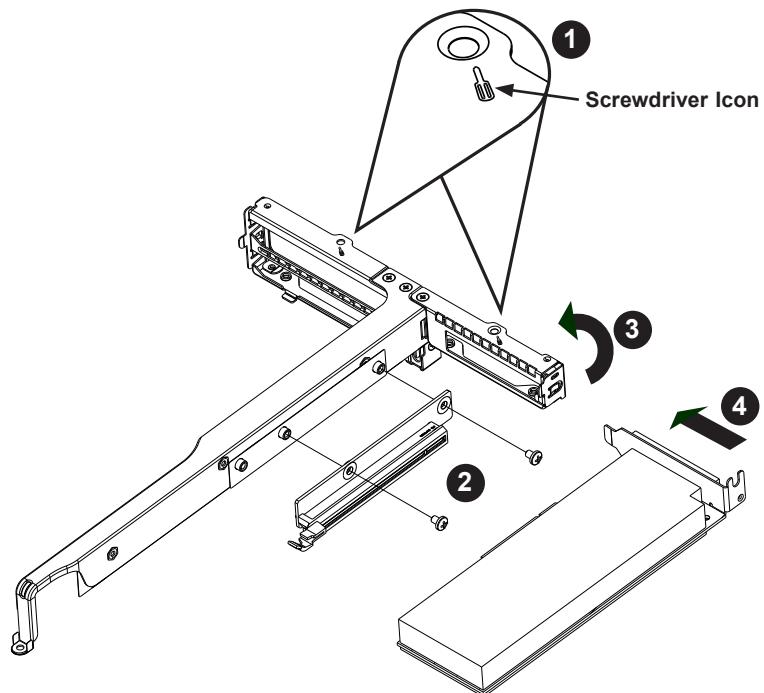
Left Riser Card Bracket Installing a Low-Profile Card
